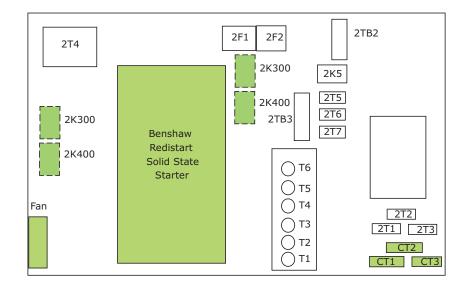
Location of Benshaw Redistart starter and additional components that are to be removed (highlighted)
